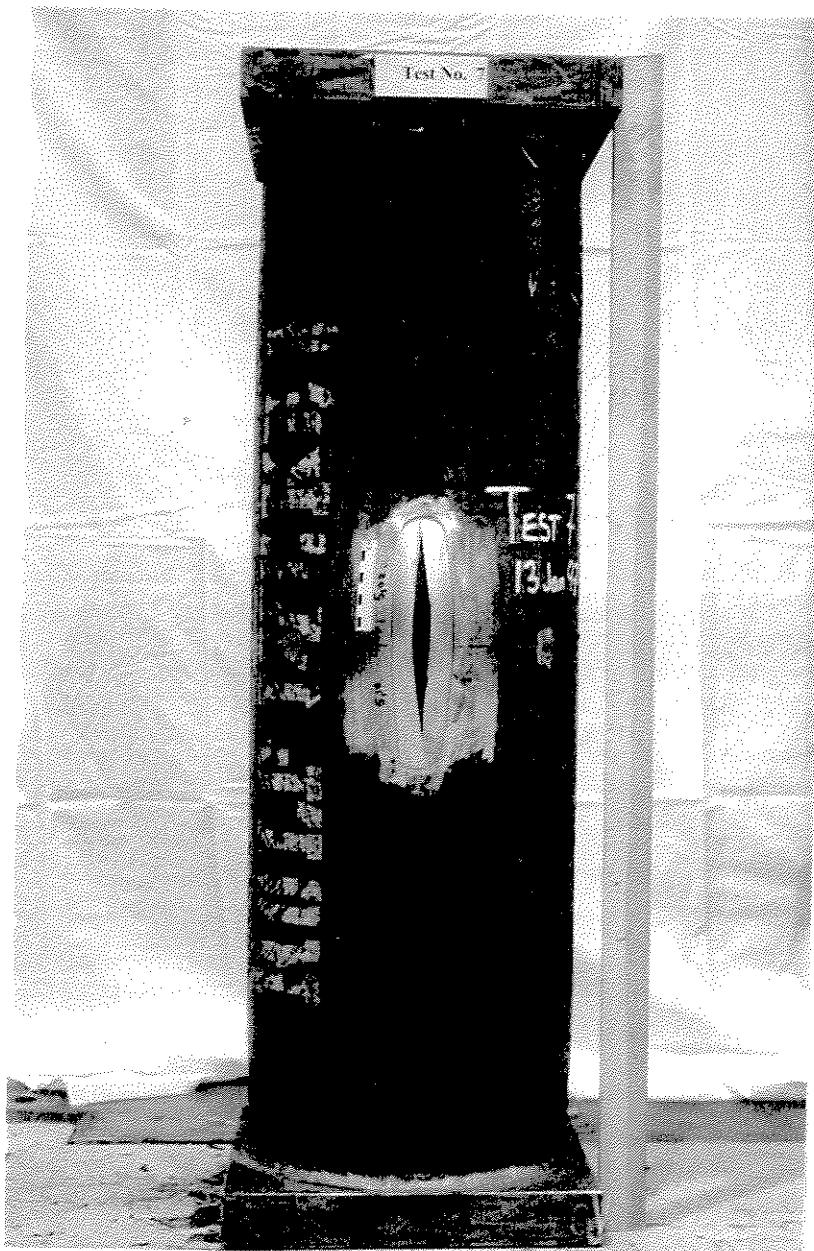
Picture of the test specimen no. 7 after the burst test
